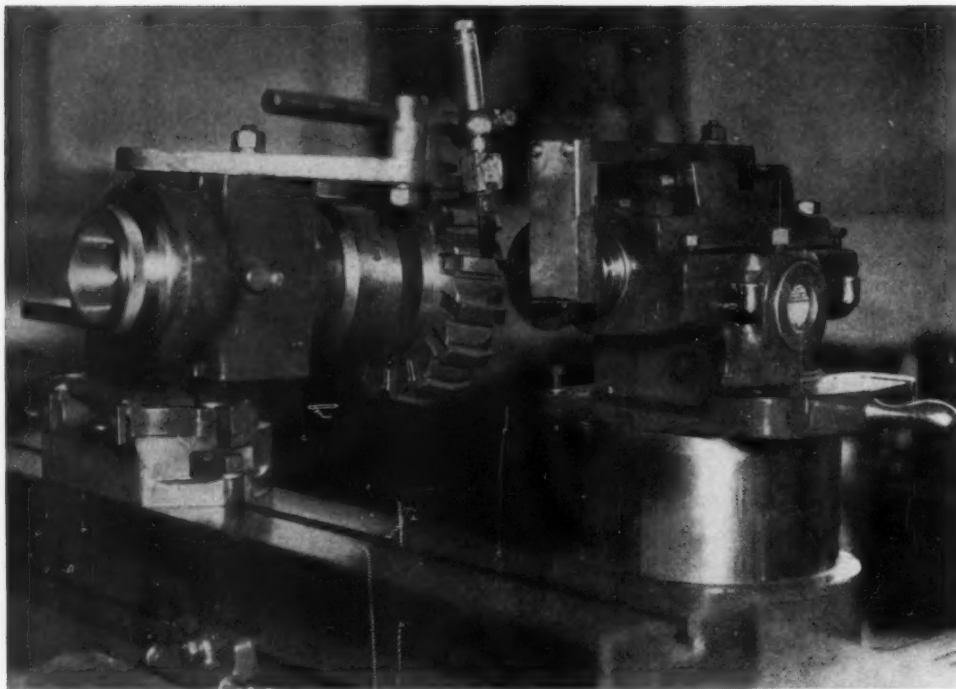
SPECIAL FELT PAD MOUNTED ON HEADSTOCK OF CUTTER-GRINDING MACHINE TO SUPPLY CORRECT QUANTITY OF COOLANT
